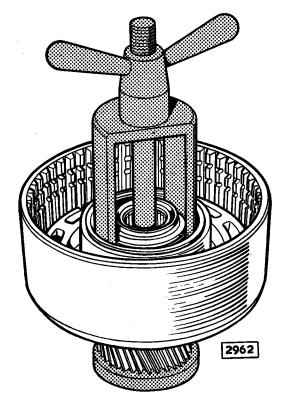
Dismantling the clutch using the special tool (Part No. CBW 37A).
